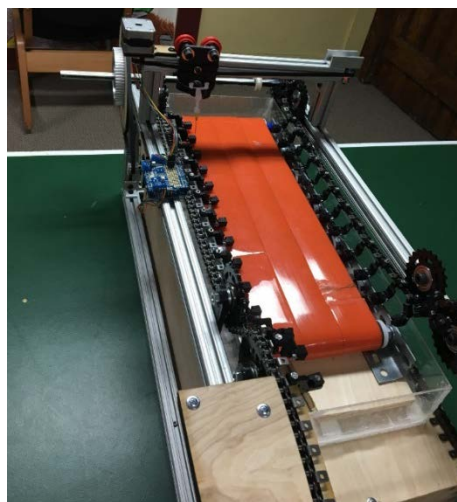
Assembled Clamps and Conveyor Incorporated in Final Design
